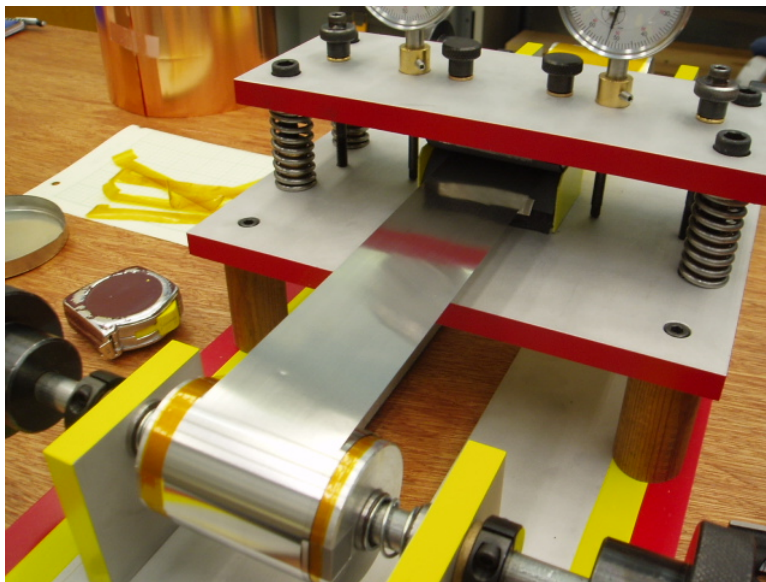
Texturing Fixture. .001" stainless foil is being textured here.
